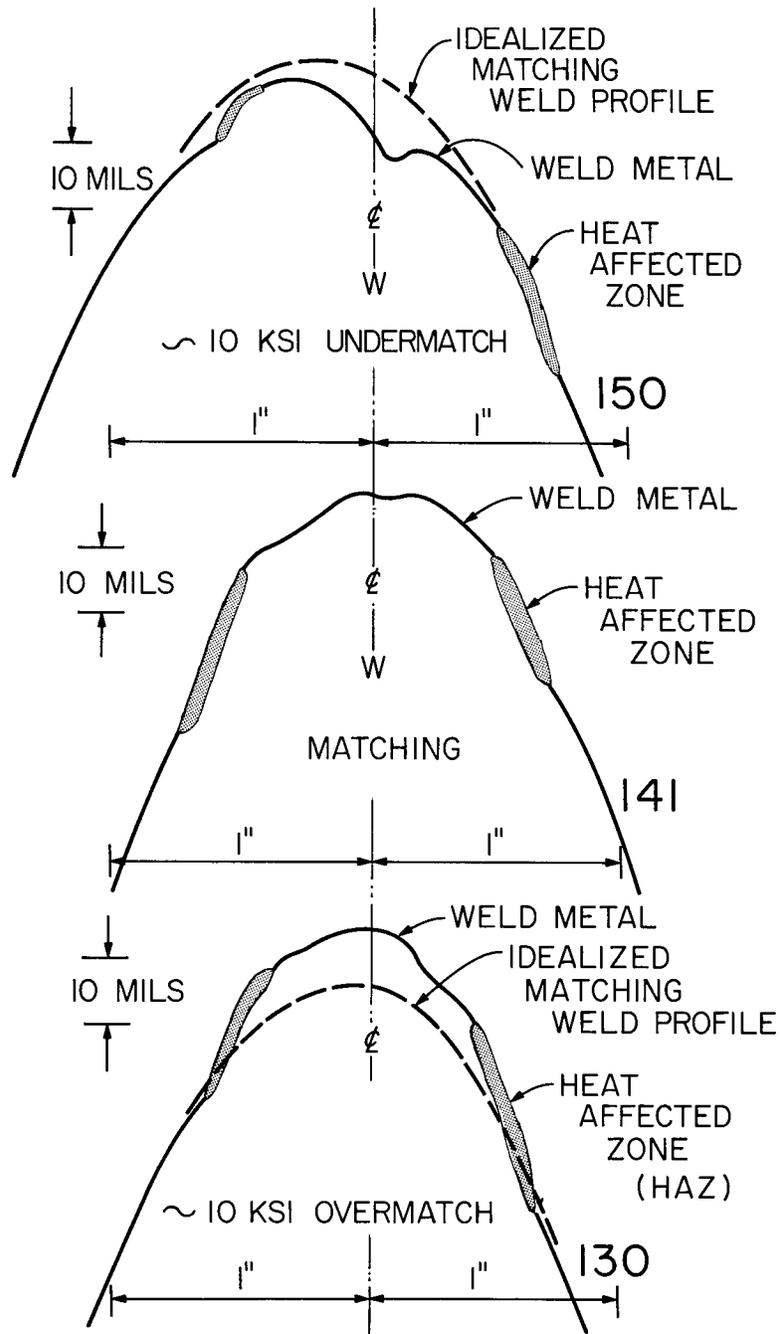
Weld profile diagrams of bulge plates shown in Fig. 20; differences produced by overmatching or undermatching the welds are indicated by the dashed lines which indicate expected contour in the absence of the weld.
